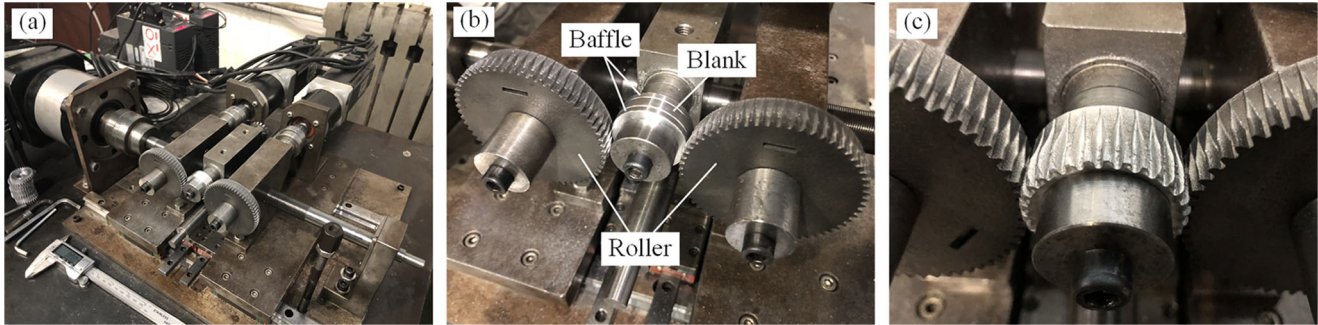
Photograph of a gear rolling device, b local enlarged view of the rollers section, and c experimental process
